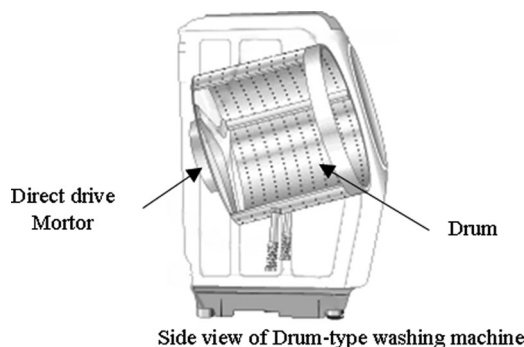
Structure of a drum-type washing machine and the drive motor.
